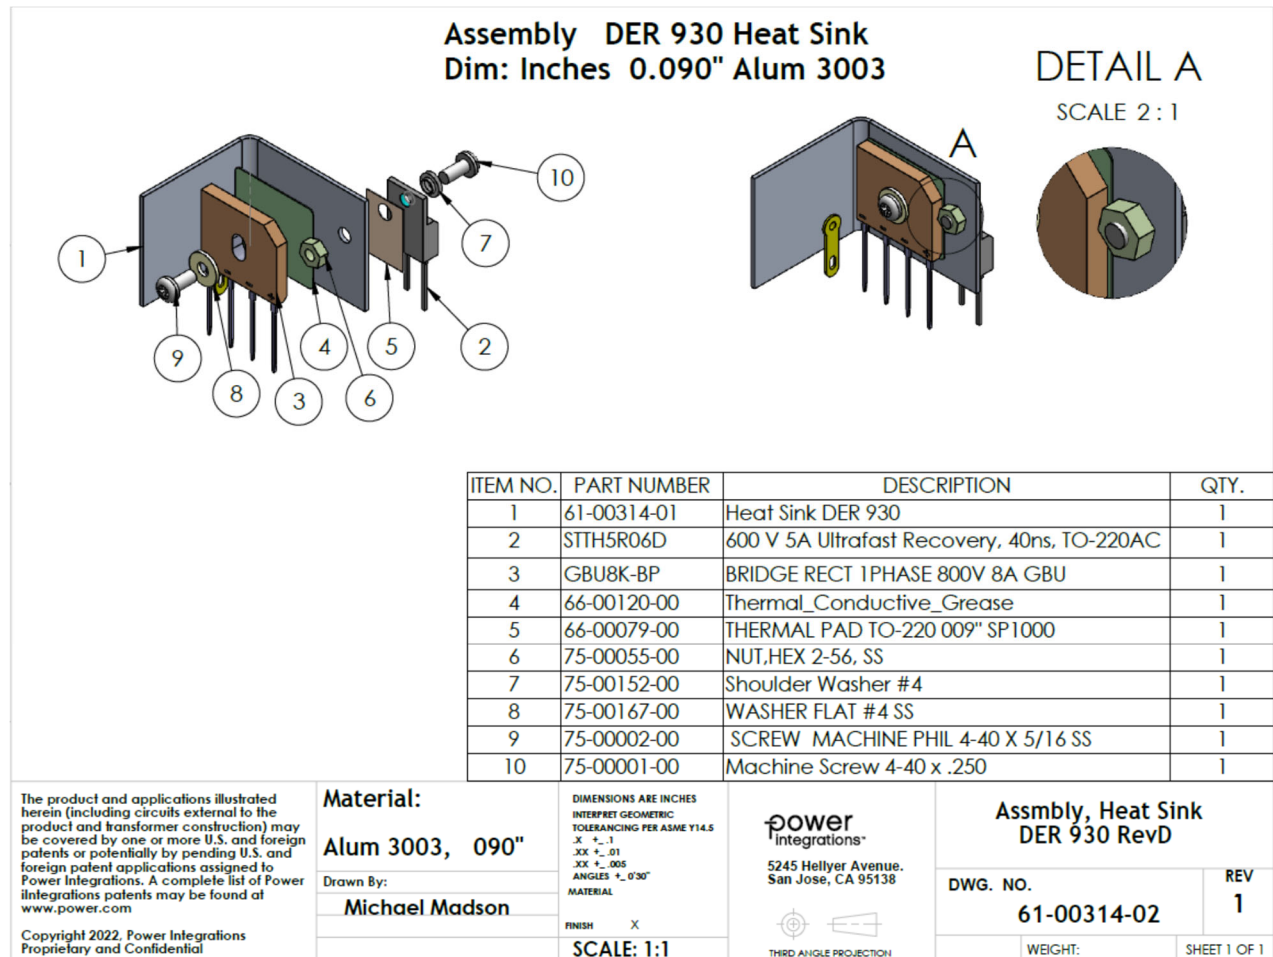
Bridge Rectifier and PFC Boost Diode Heat Sink Assembly Drawing.
